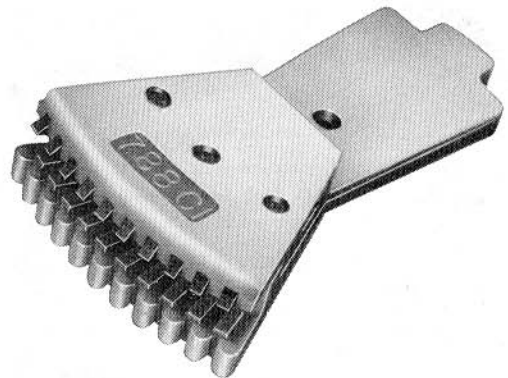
788C1 Tool, 5-Pair Cutoff Tool
